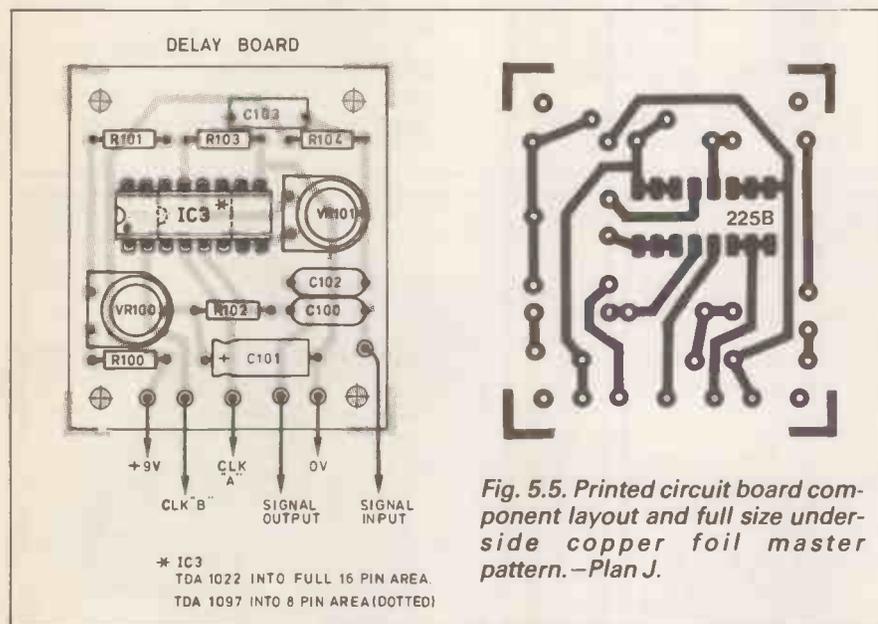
Printed circuit board component layout and full size underside copper foil master pattern. — Plan J.
